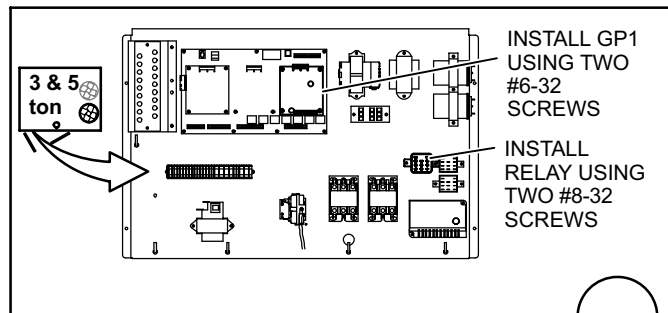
Installing Relay (K92) and General Purpose Board (GP1) (SCA/SGA036/060)
